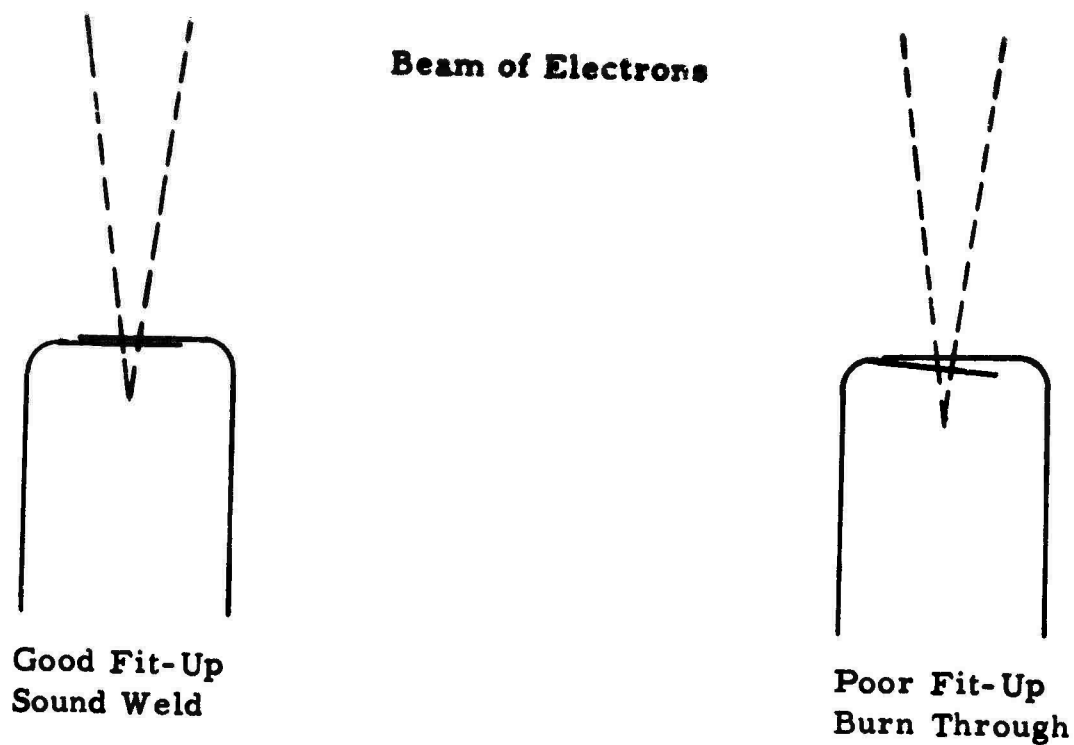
Edge Flange Condition During Electron Beam Welding.
